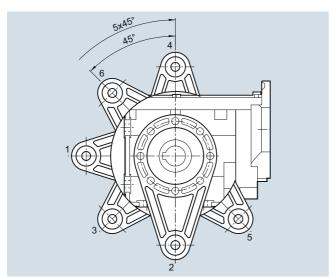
/8 Bevel gearboxes BAD., sizes 19 and 29
